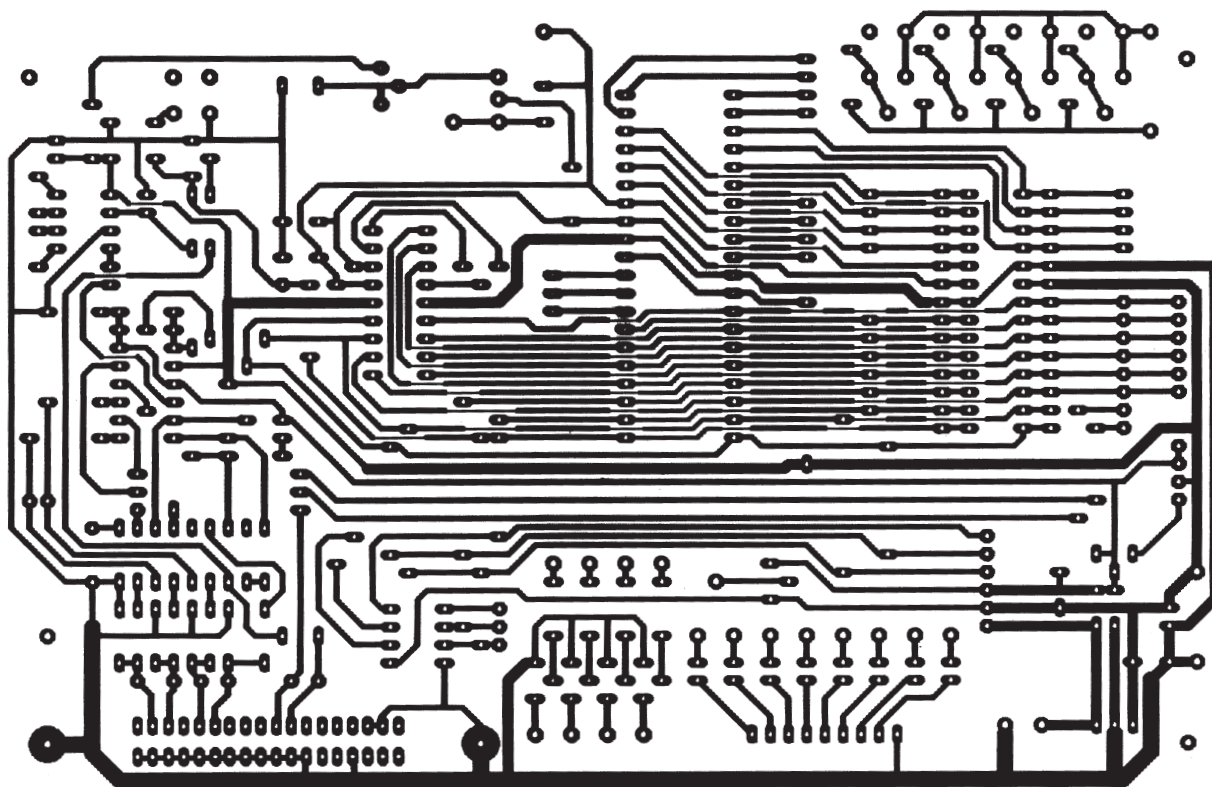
Printed circuit board component layout and full size master track pattern for PIC Toolkit Mk3, showing positioning of optional breadboard.
